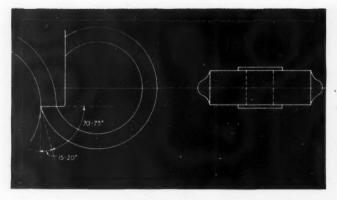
Drawing of Forming Toel ground to provide the required contour.
